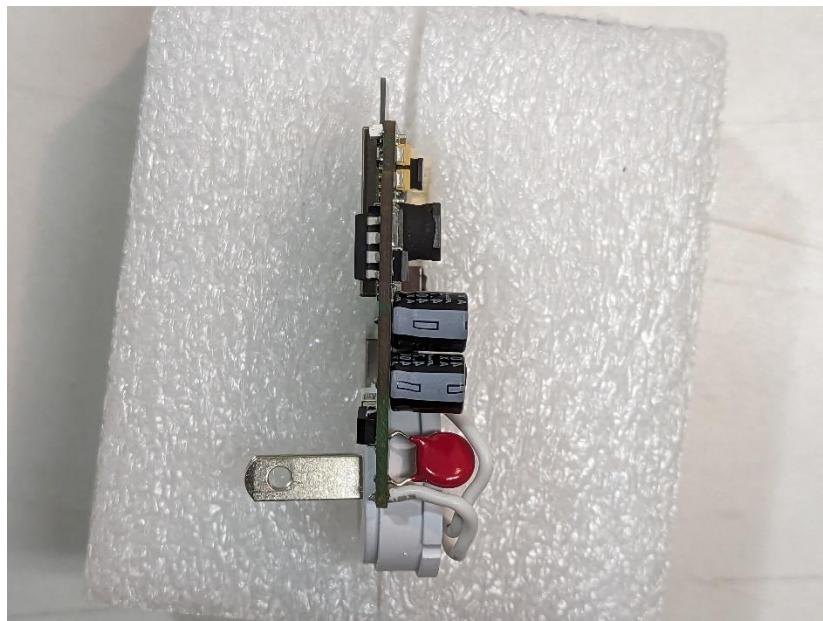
Placement of PCB Removed from Enclosure Showing Antenna Connection
